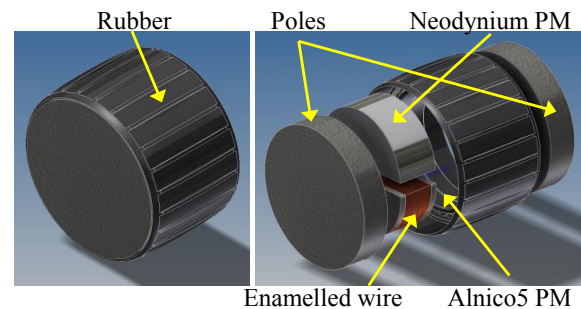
EPM wheel. (Left) Initial design with full steel poles. (Right) Components of the EPM wheel.
